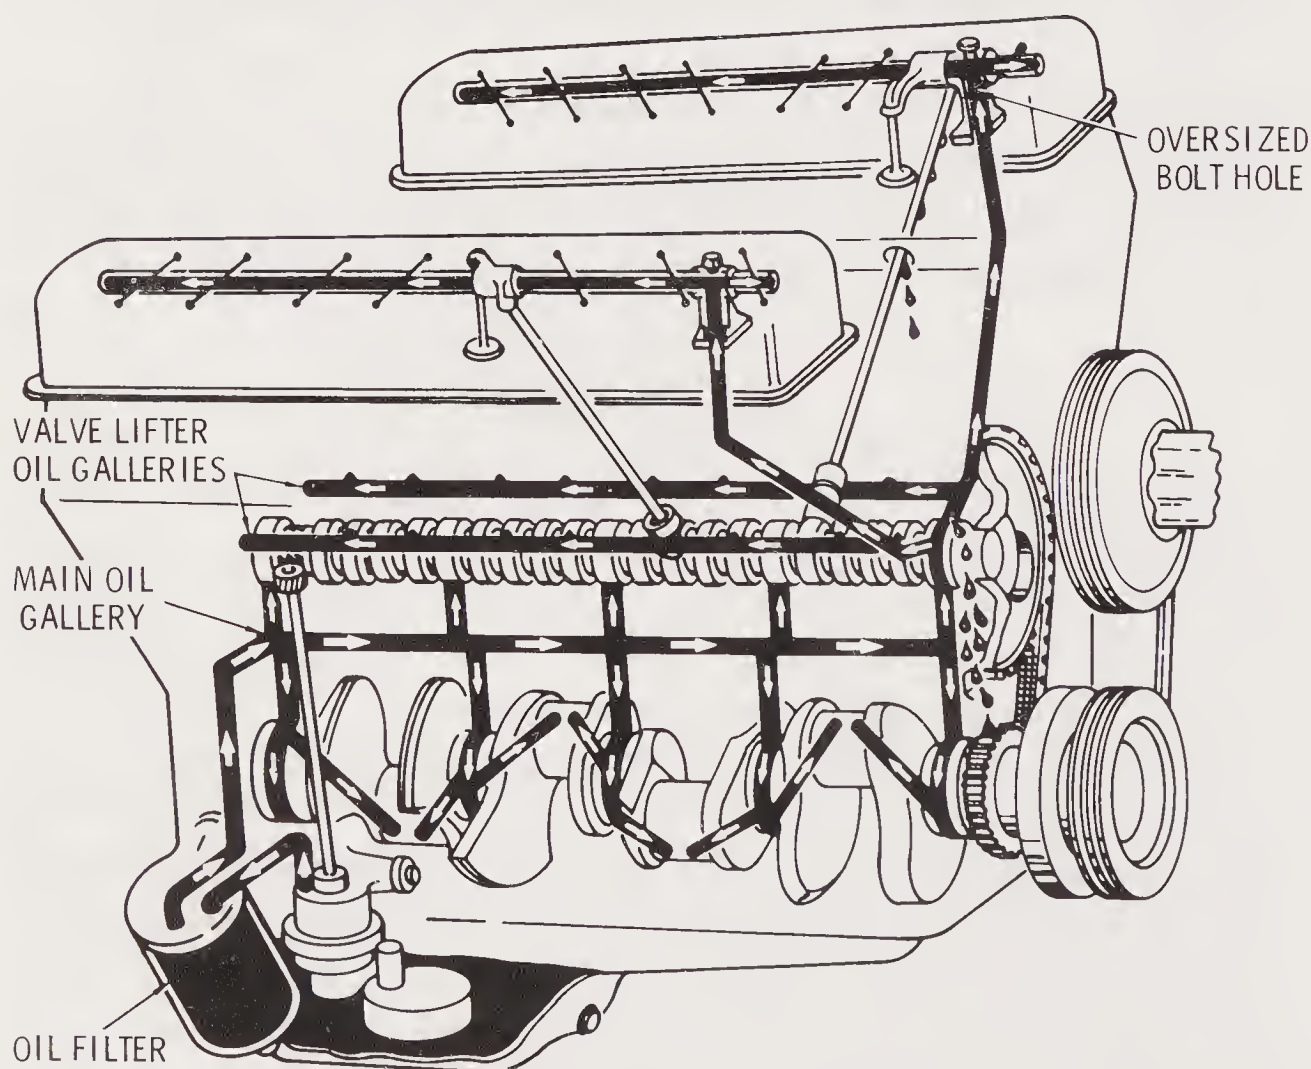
Full-pressure lubrication as applied to a typical V-8 engine.
